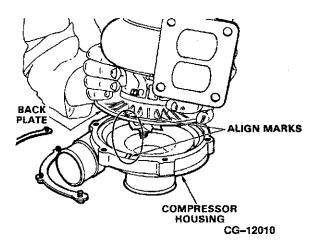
Assemble Compressor Housing and Center Housing Back Plate (Align Marks)
